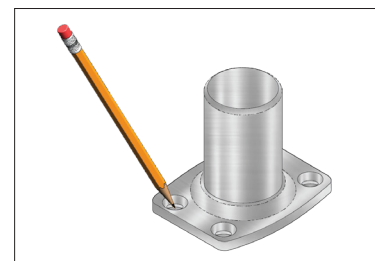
Figure B. (Right) After dry fitting, mark holes using the Rail Mounting Base (S0950-0001).
